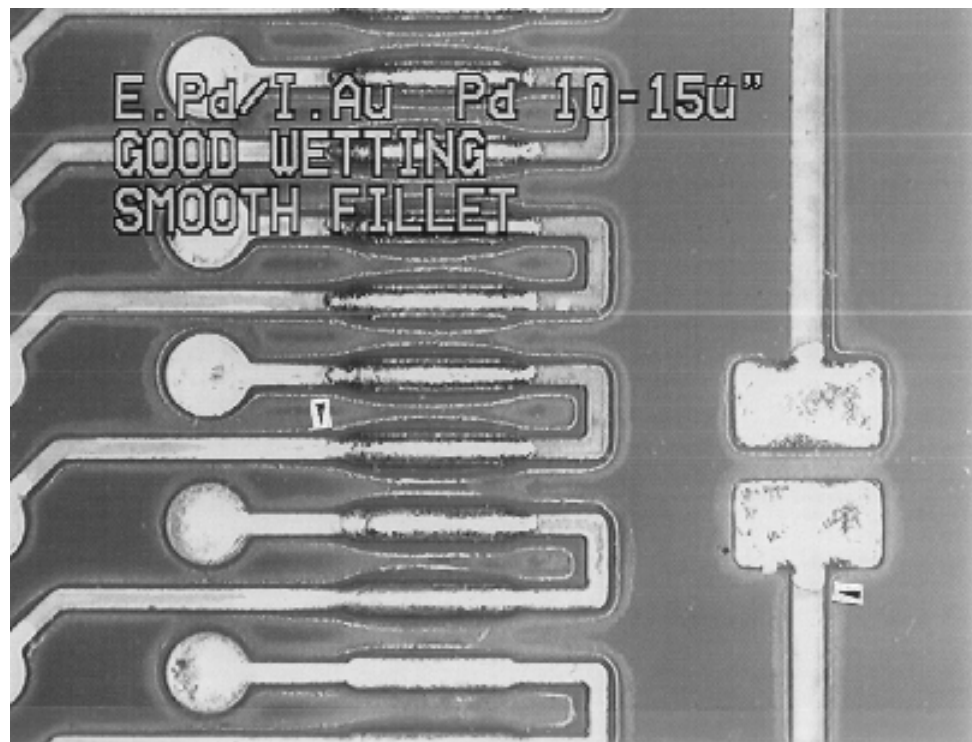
Solder Wetting on Electroless Palladium / Immersion Gold
